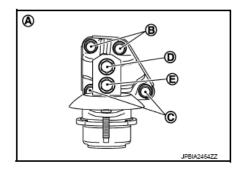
Engine Mounting Bracket Upper And Lower Bolts Tightening Sequence (Rear) Courtesy of NISSAN MOTOR CO., U.S.A.
